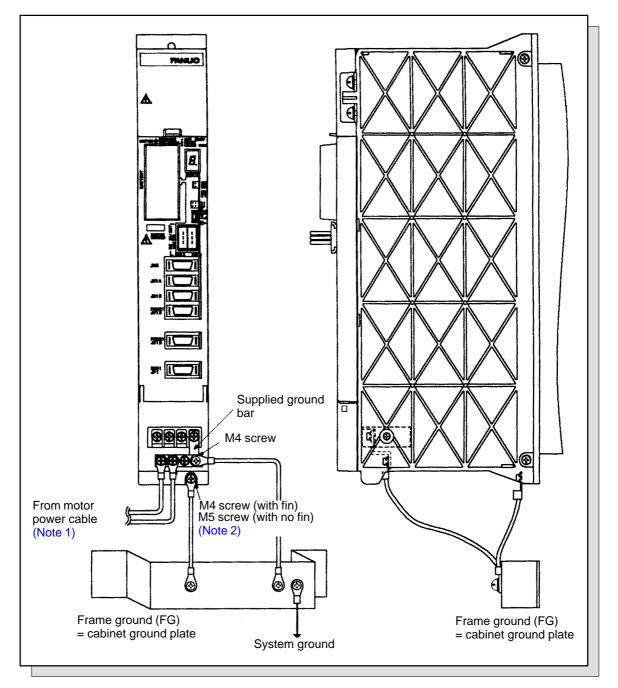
(e) Ground Cable Connection (SVM1-12, 20, 40S, 40L, 80)
